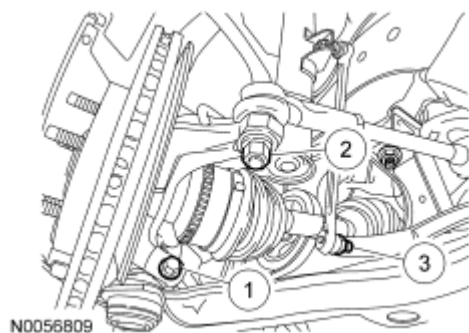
Identifying Lower Ball Joint-To-Knuckle Bolt, Retaining Nut And Stabilizer Bar Link
